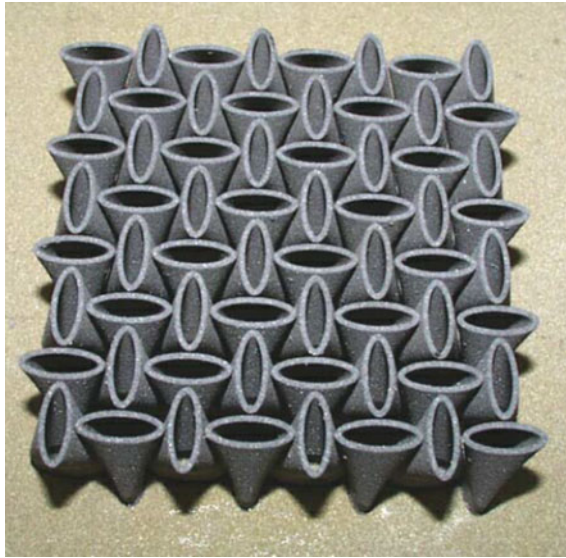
Planar assembly of interlocked twisted hollow tubes produced by selective laser sintering [2, 83, 84]
